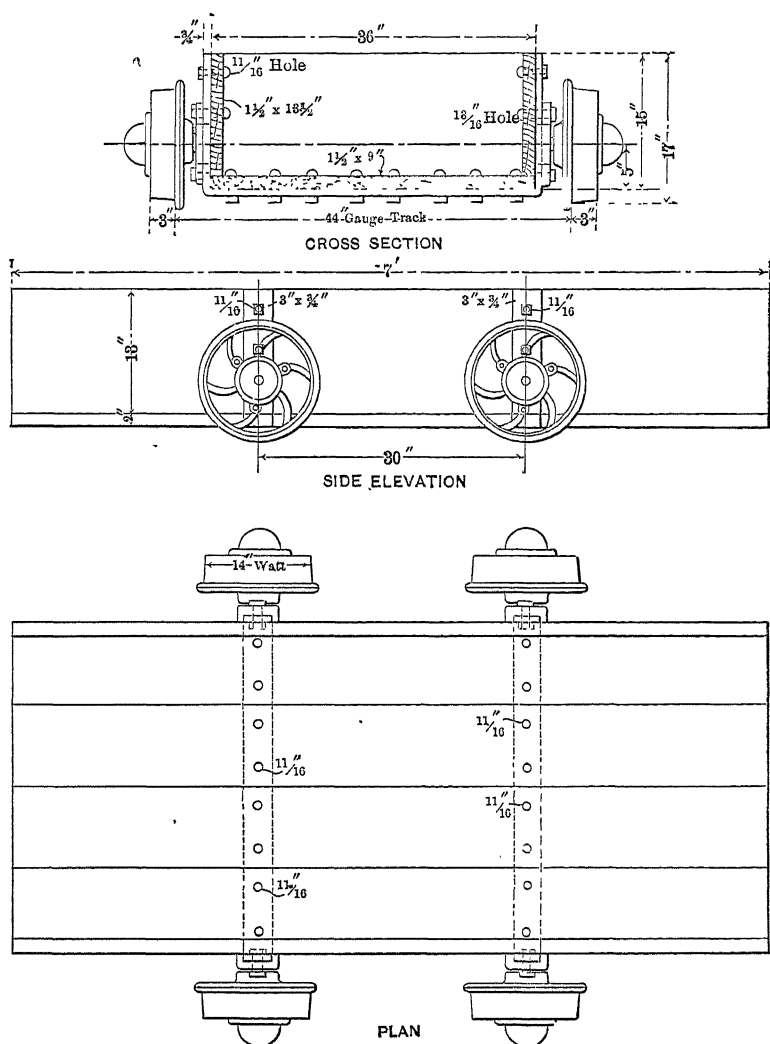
COAL-BUGGY. BUILT BY THE DECATUR CAR-WHEEL MANUFACTURING CO. FOR THE ALDRICH MINING CO.
